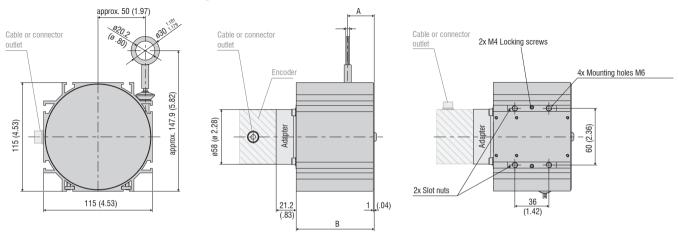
Dimensional drawing WDS- ... - P115 - XX - XXX, dimensions in mm (inches, rounded-off)
